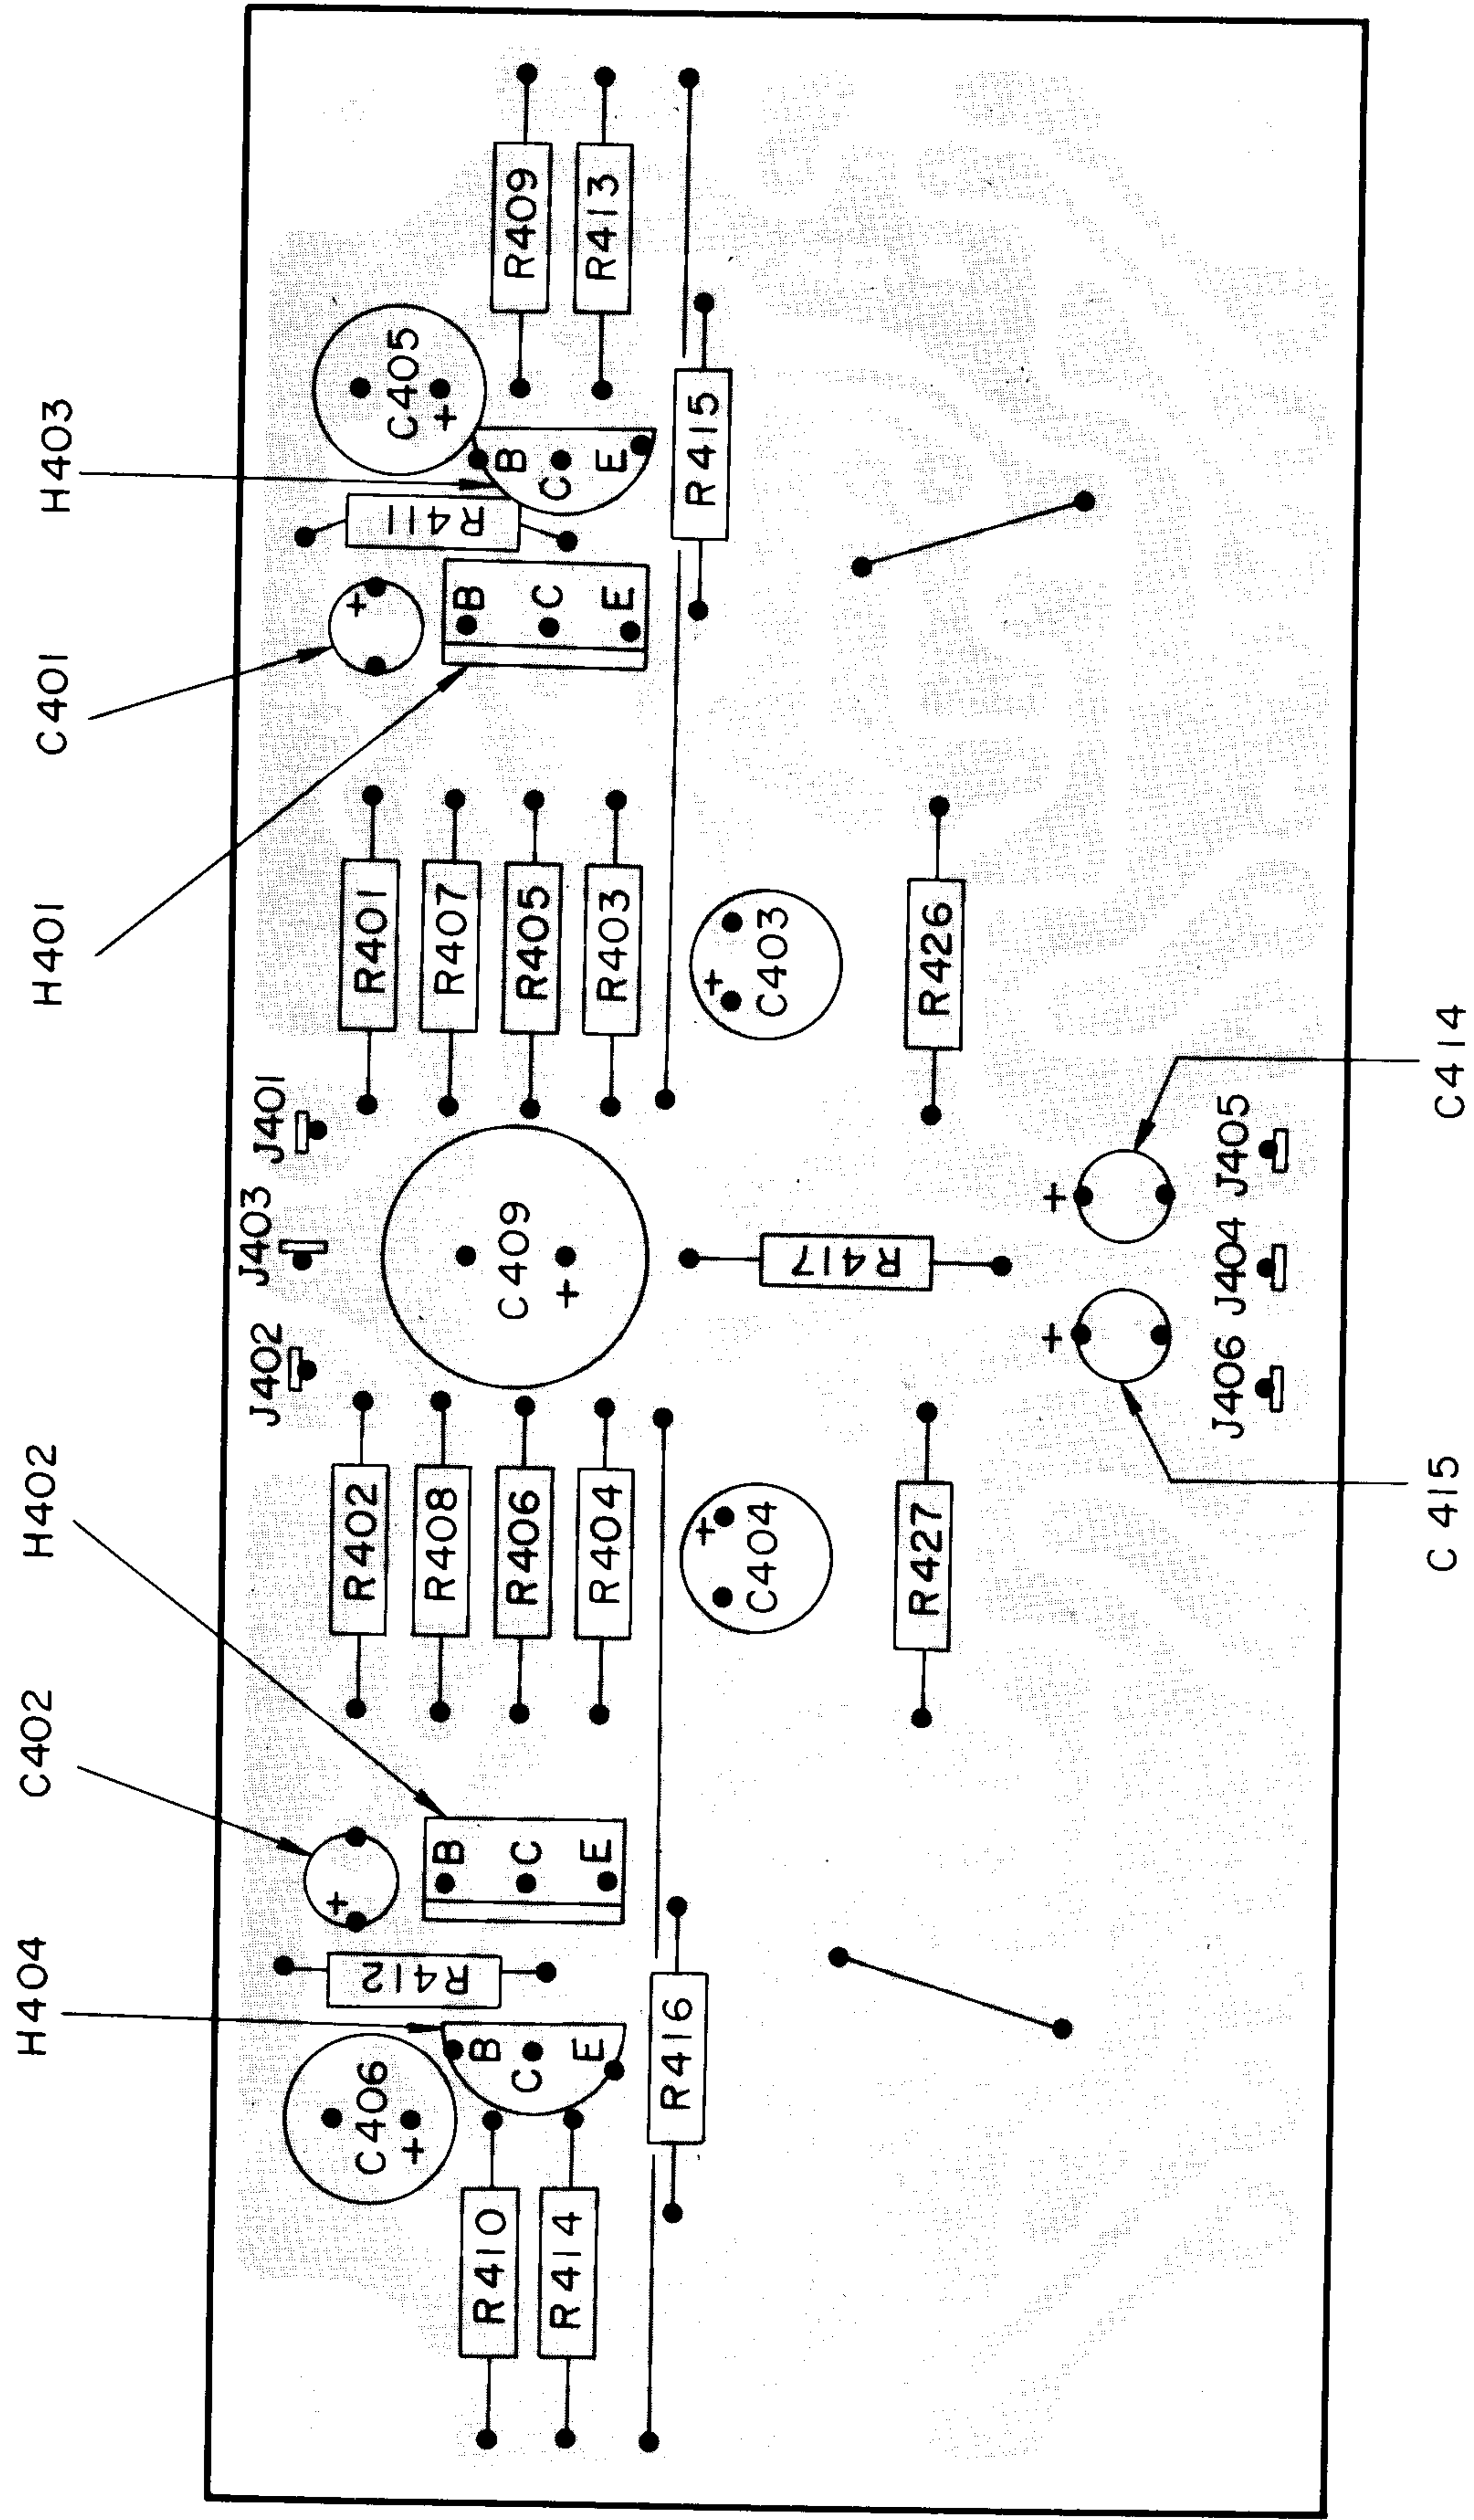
Tone and Pre Amplifier Assembly P400 Component Locations
